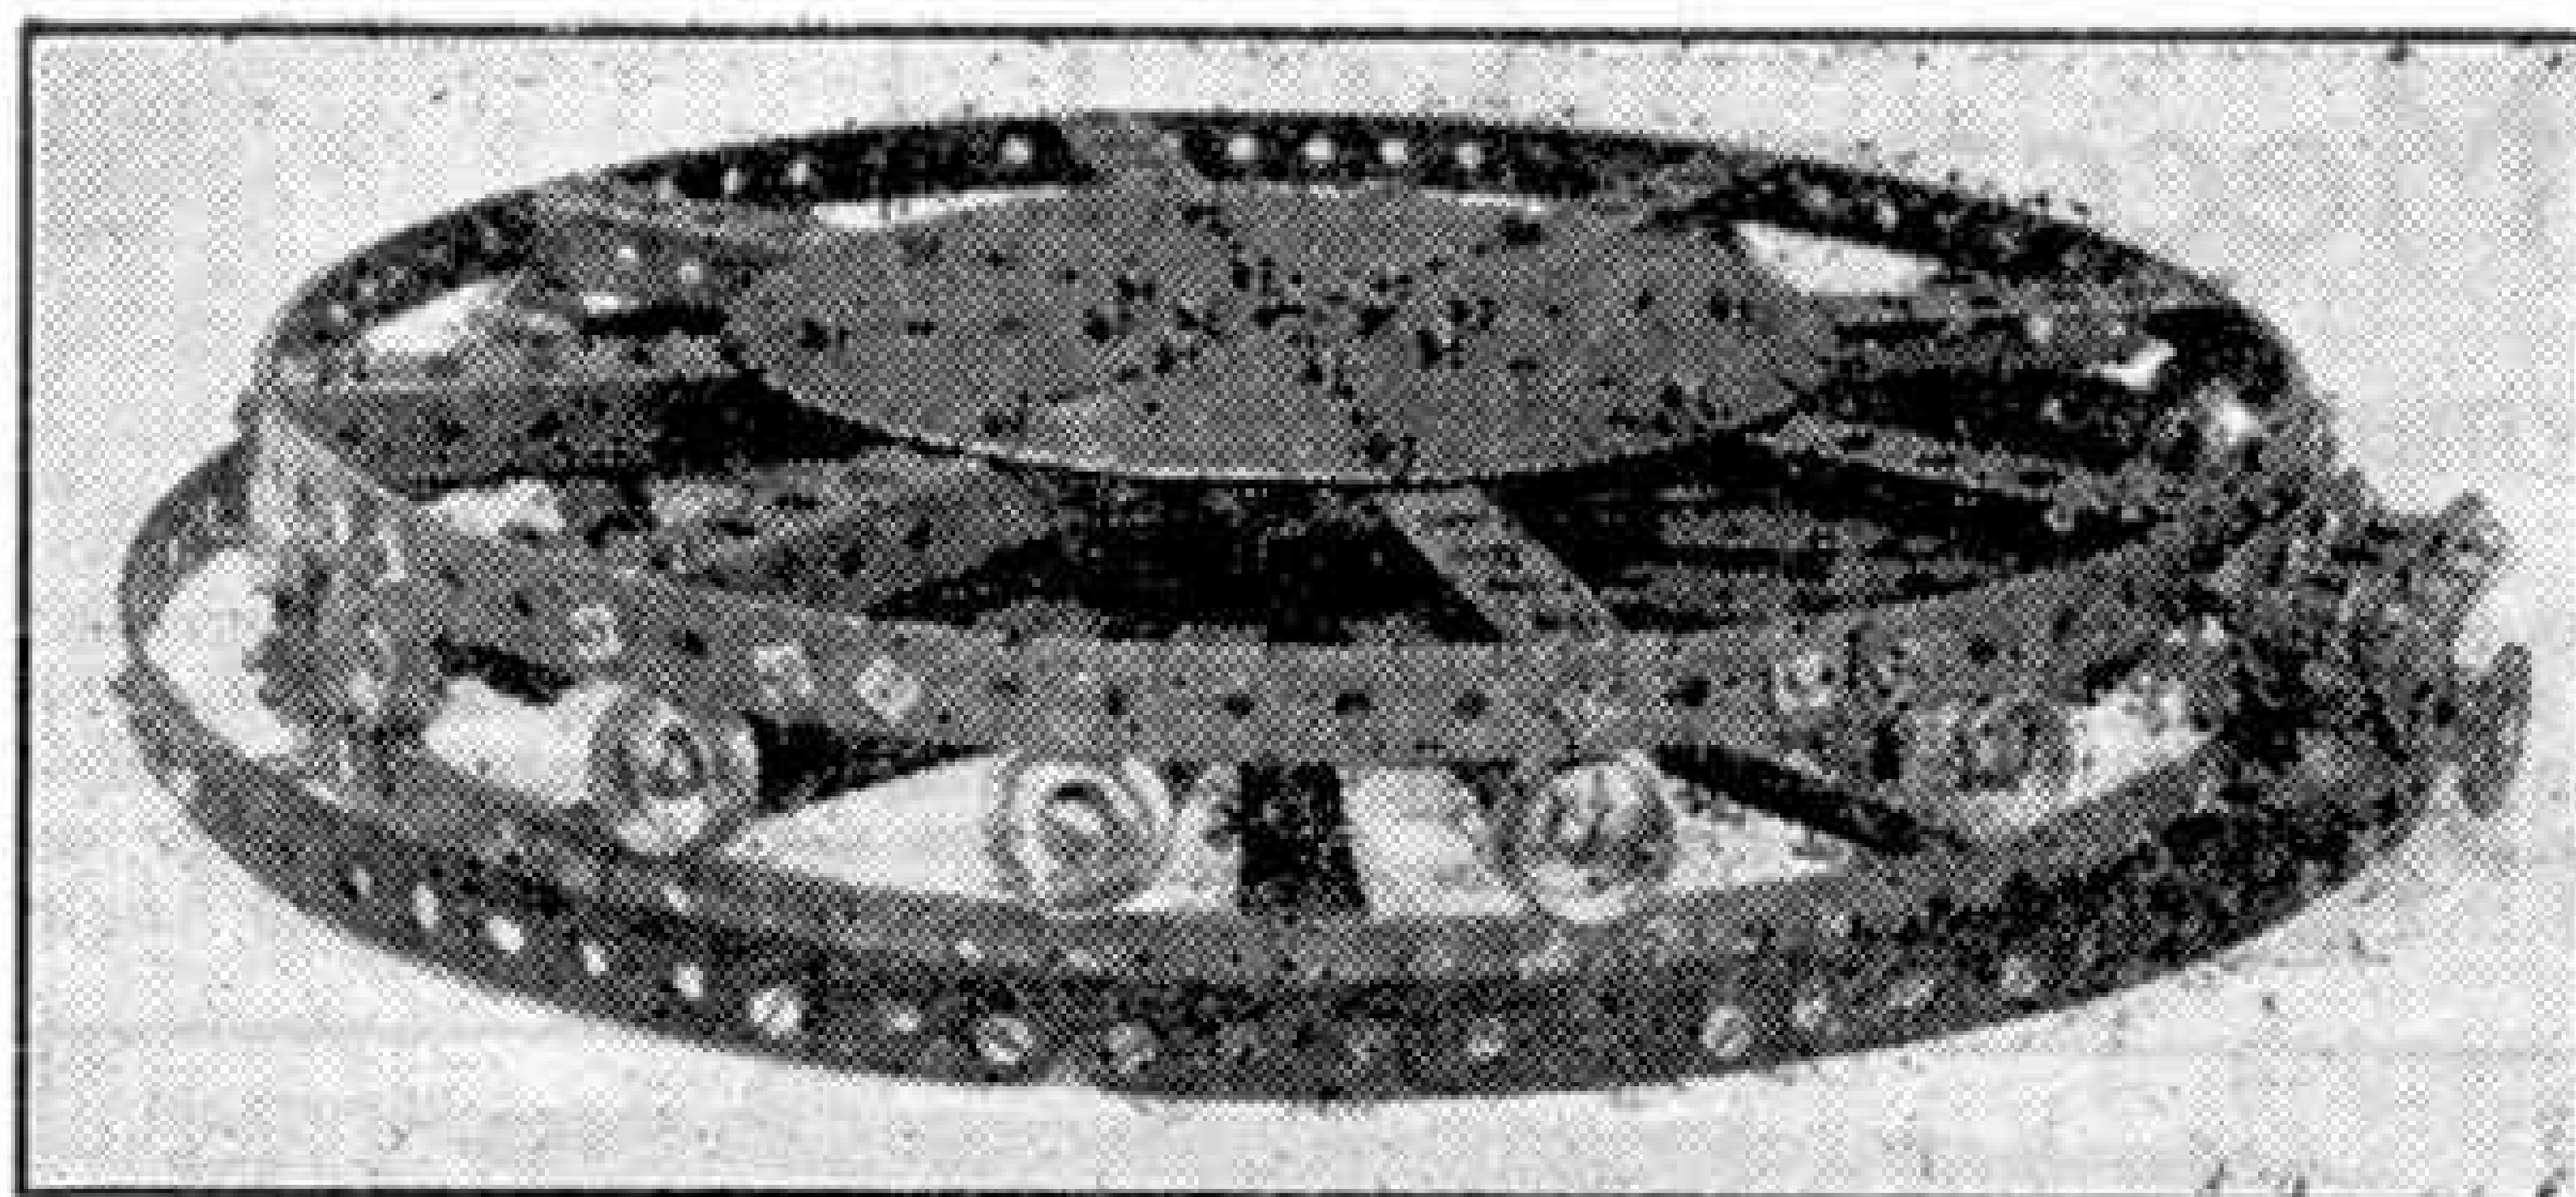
A built up geared roller bearing capable of carrying a heavy superstructure. It is designed by W. N. Cramer, Clinton, Illinois, U.S.A.
